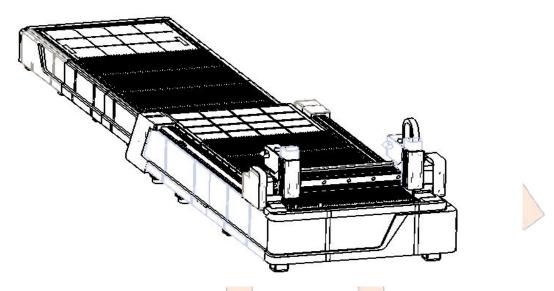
External view of E series cutting machine (with exchange platform)
